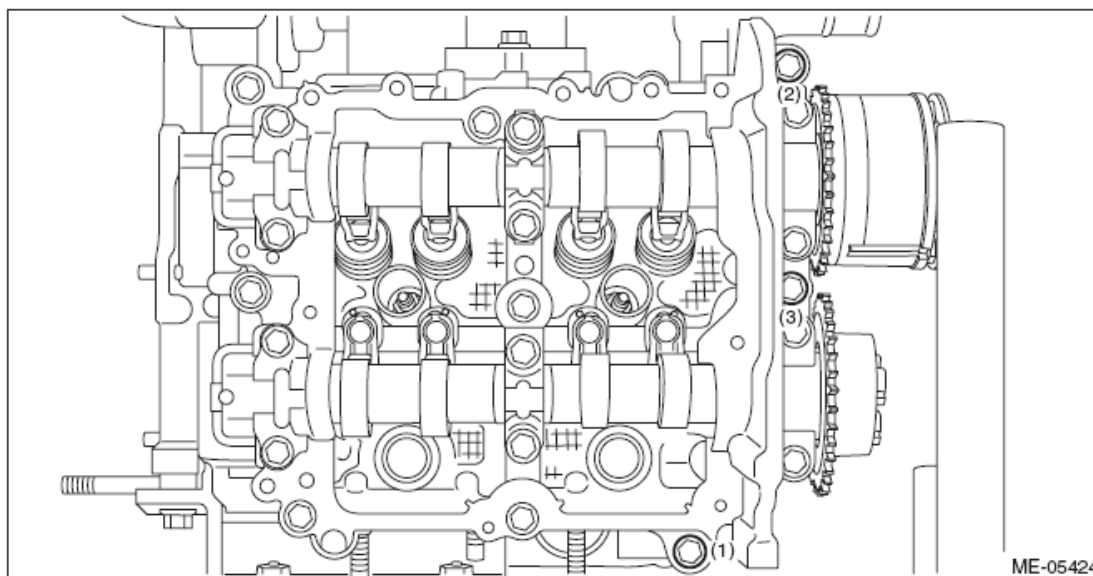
Identifying Cam Carrier Bolts Loosening Sequence
